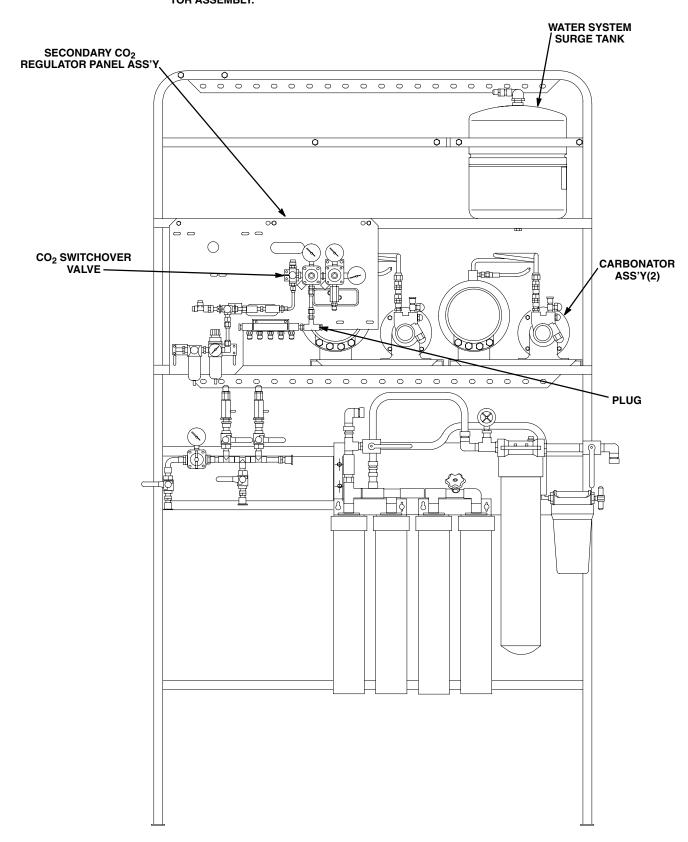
STANDARD BEVERAGE CONTROL PANEL ASS'Y
